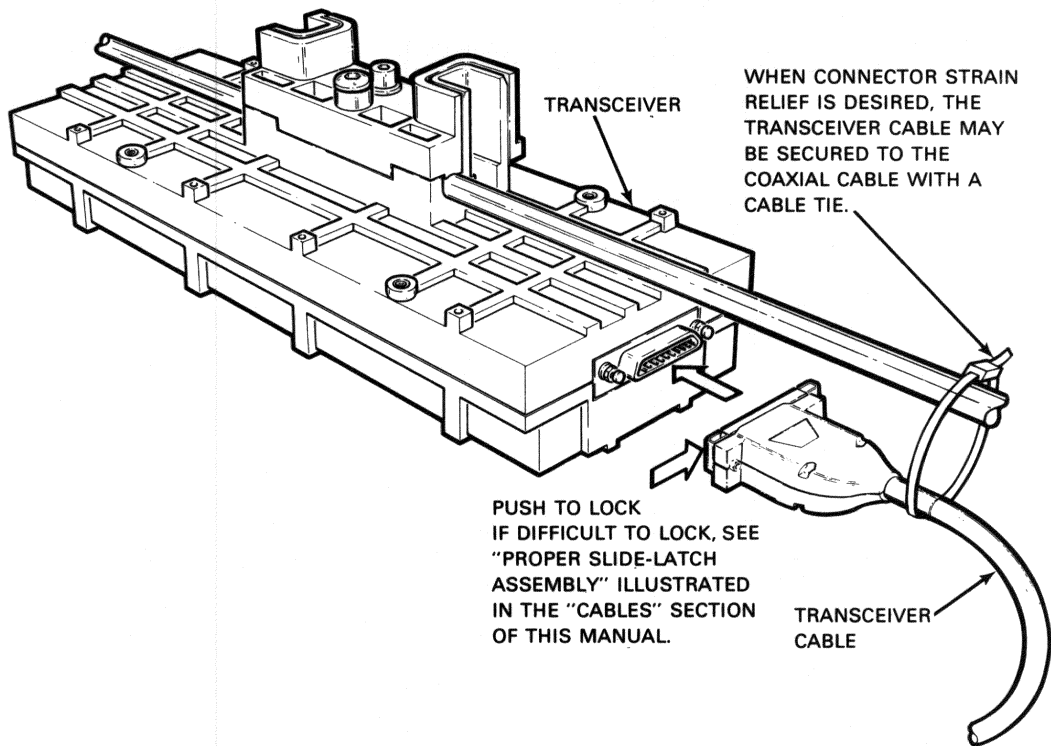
H4000 Ethernet Transceiver: Cutaway View Showing Coaxial Cable Interface
